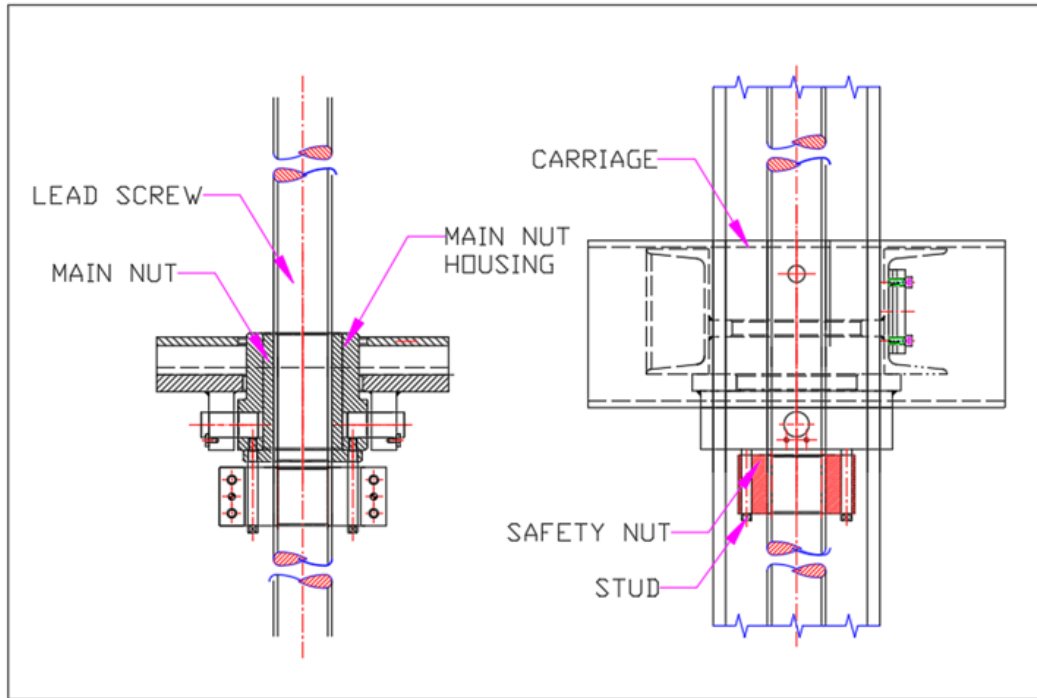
(h) Assembly drawing of Floating Nut and Safety Nut
